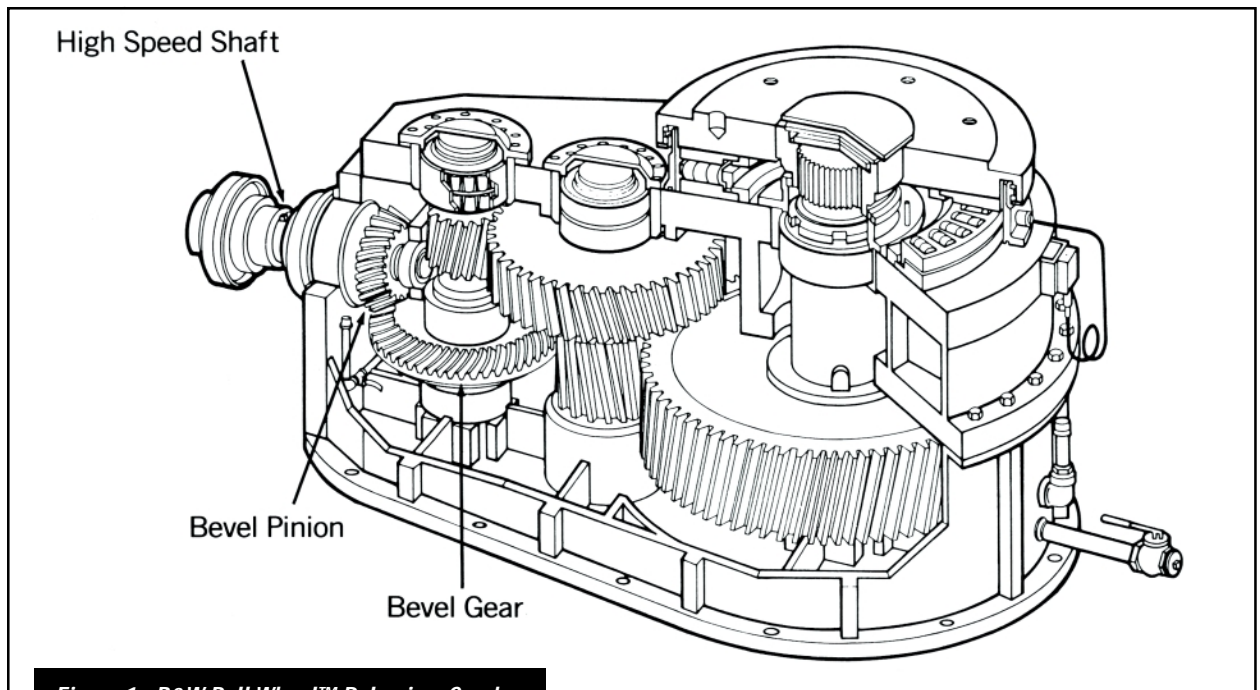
B&W Roll Wheel™ Pulverizer Gearbox
